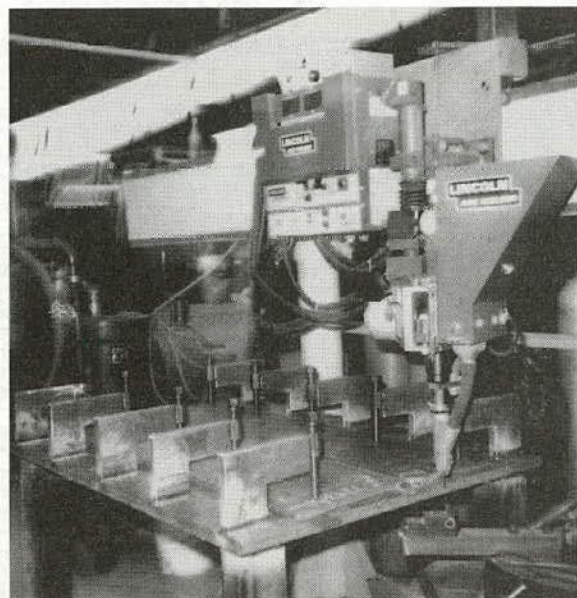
SAW system showing the fixture for welding of panels for fatigue testpieces.
